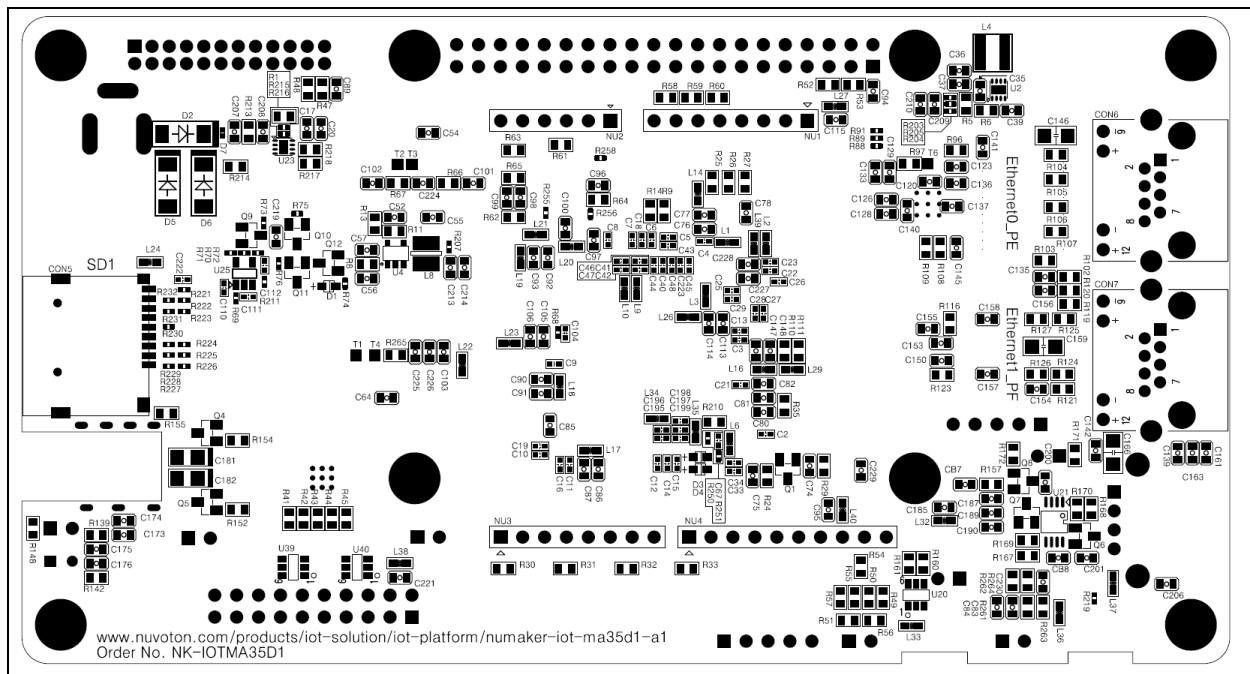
Rear PCB Placement of NuMaker-IoT-MA35D1-A1 Board
